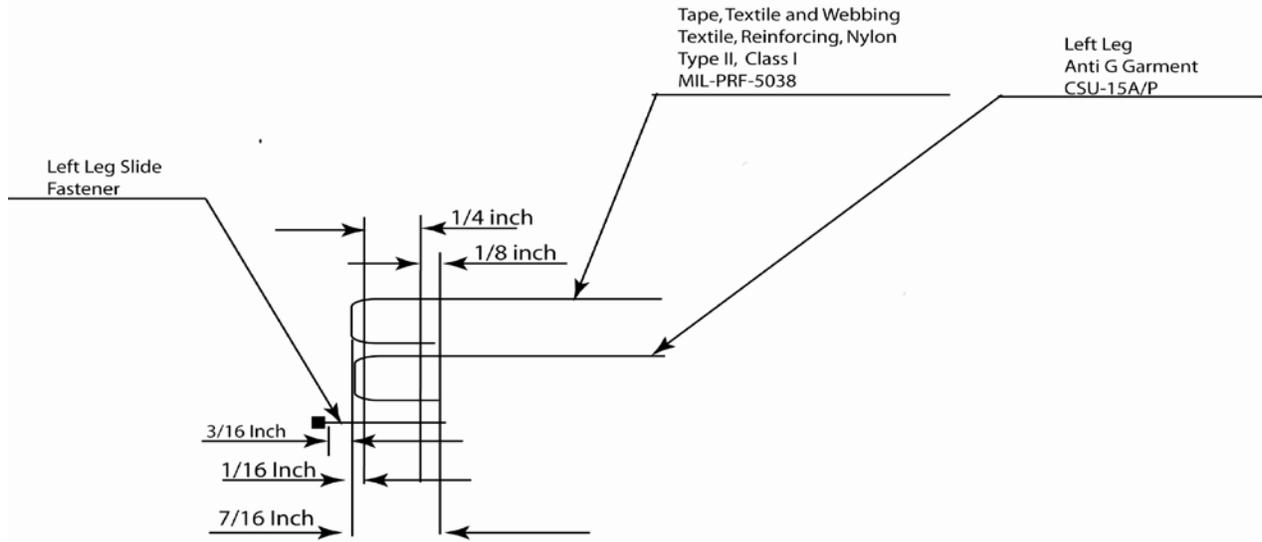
Detail C Attachment of Kneeboard Assembly to Leg Thigh Take-up Side.
